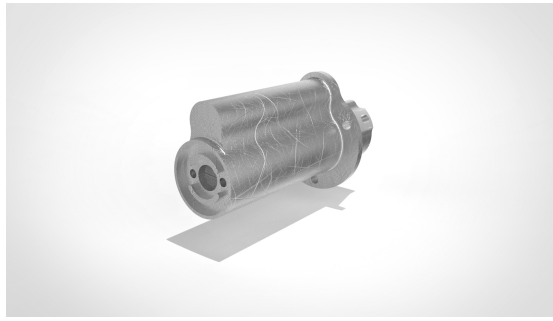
Motor bushing of Lunar Zebro. Front side view where the motor shaft will protrude the bush. Above the motor there is a hollow shaft where a Hall-effect sensor can be inserted. The opening of this shaft is not visible.
